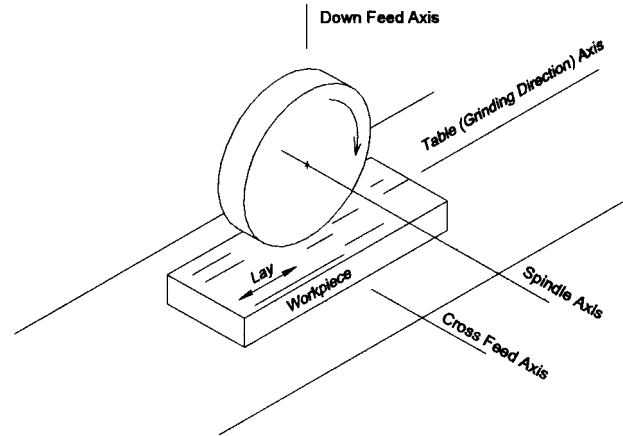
Machine Axes for Horizontal Spindle Reciprocating Surface Grinder
